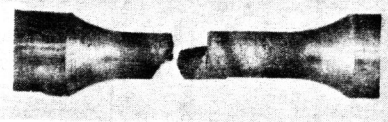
The appearance of the torsion fracture surface of the solid specimen.
